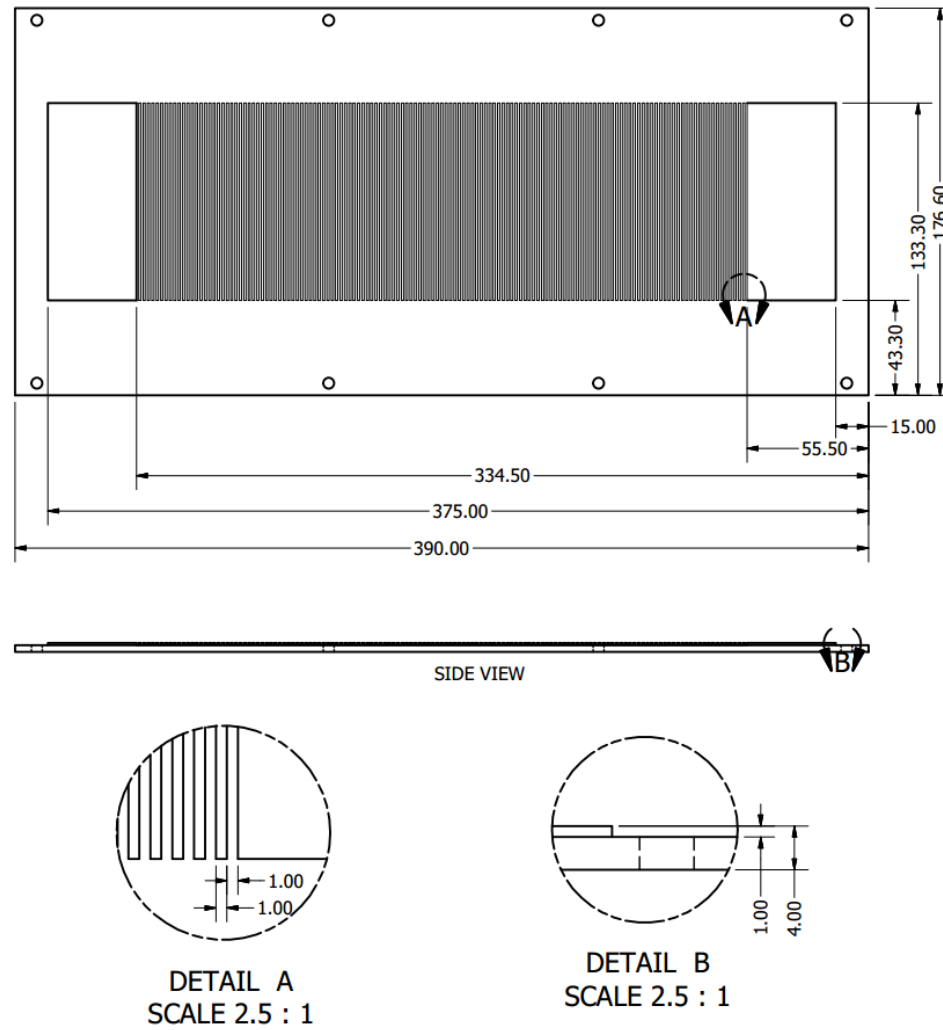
A CAD drawing showing the overall dimensions of the heat transfer plate. Details A and B illustrate the minichannels design.
